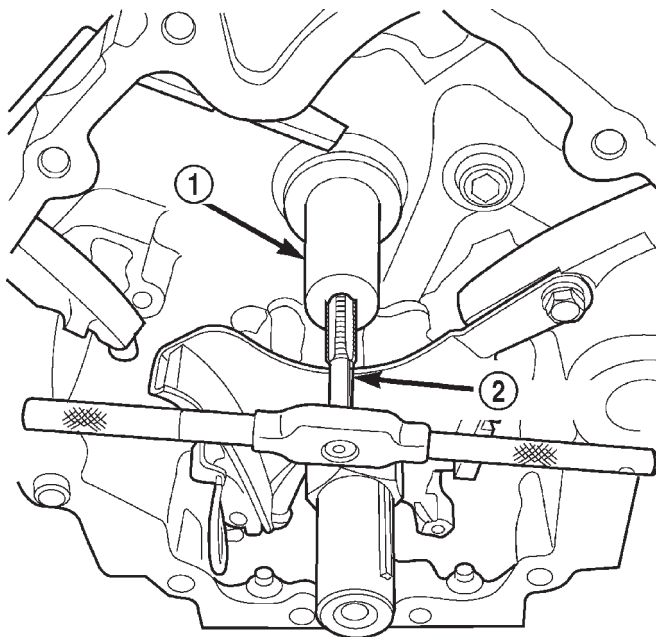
Tapping Idler Shaft For Special Tool 8517
